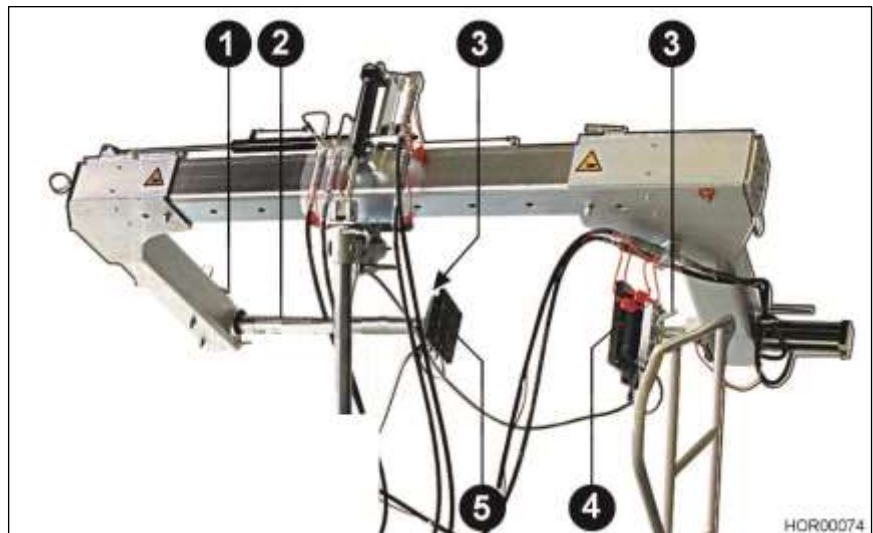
TP EM III Vulcanizing Machine (heating plate)
